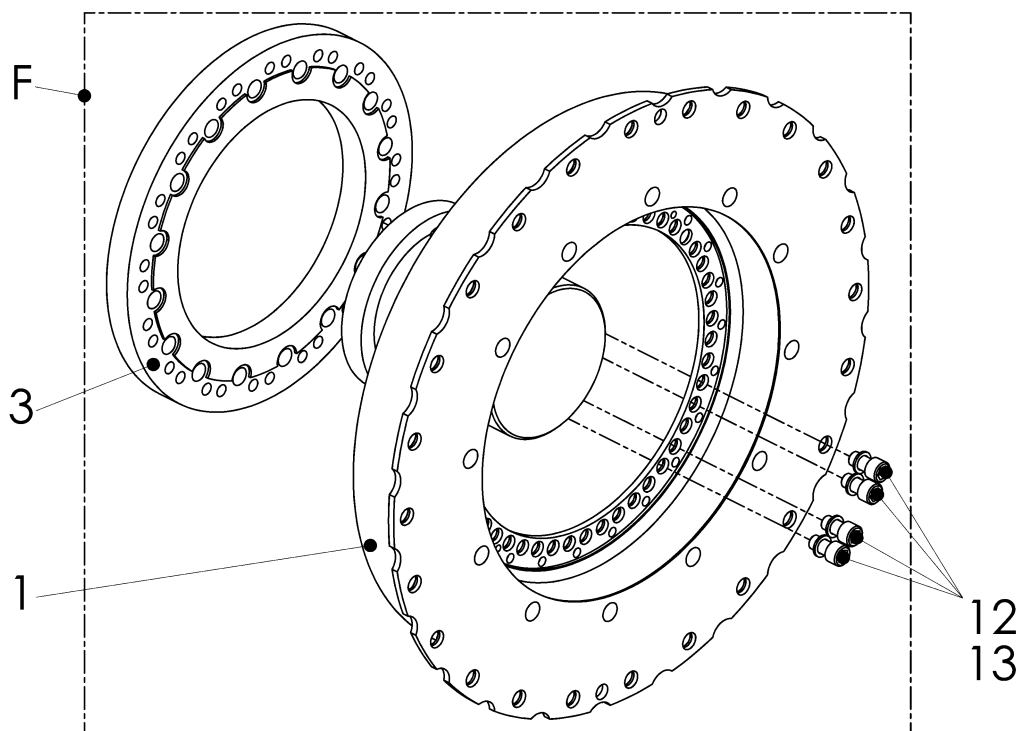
Dismantling the rubber element assembly of the coupling sizes 64...78 and 81...85
